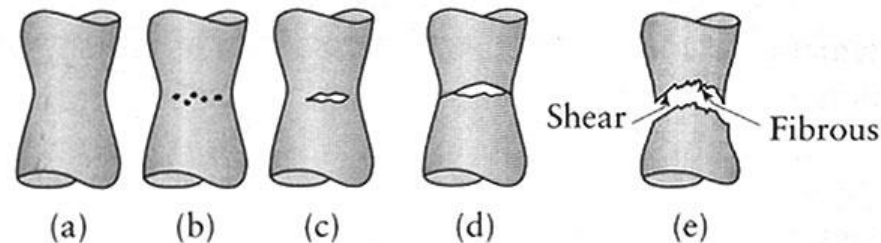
Sequence of events in necking and fracture of a tensile-test specimen: (a) early stage of necking; (b) small voids begin to form within the necked region; (c) voids coalesce, producing an internal crack; (d) rest of cross-section begins to fail at the periphery by shearing; (e) final fracture surfaces, known as cup-(top fracture surface) and-cone (bottom surface) fracture.
